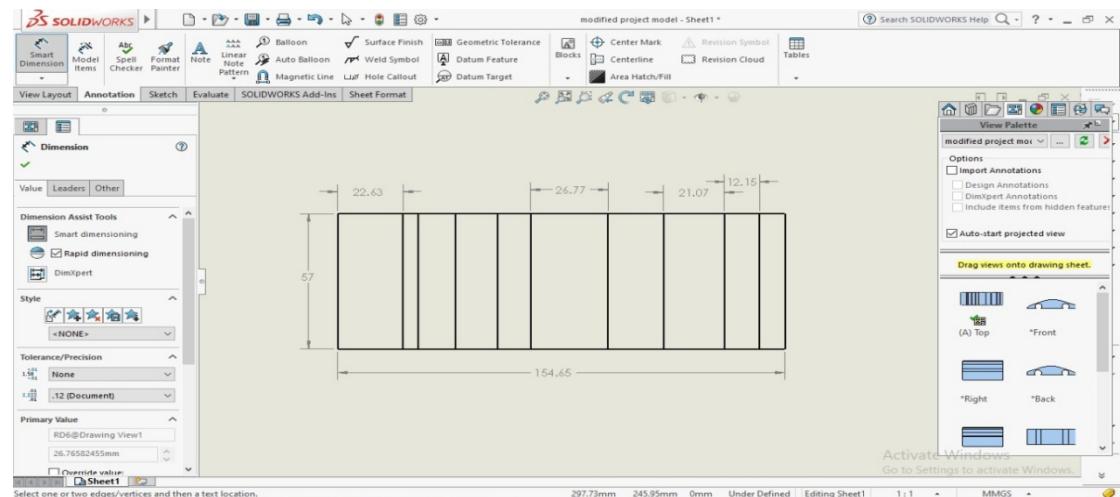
Drag Minimised Model Dimensions with Top View
